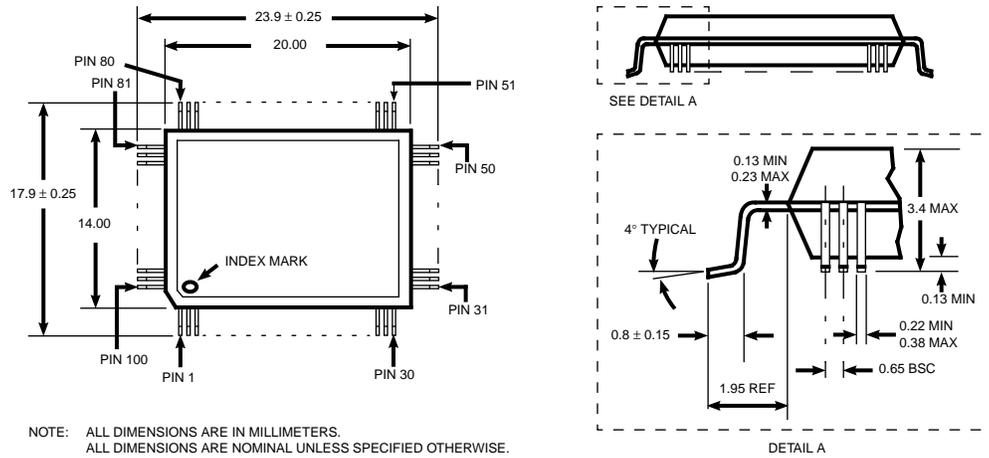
FAS236/236U 100-Pin PQFP Mechanical Drawings
